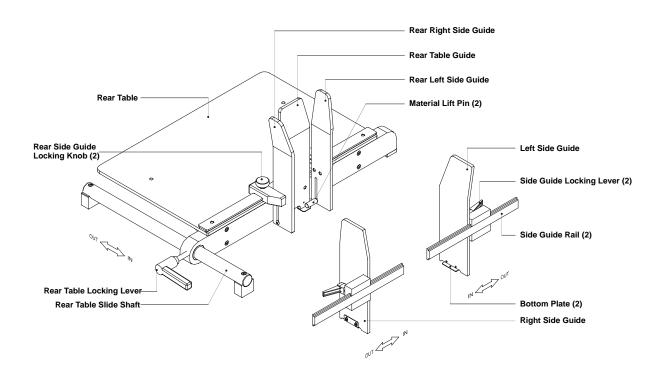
Rear table and side guide illustration indicating the various adjustment points of the feeder.
